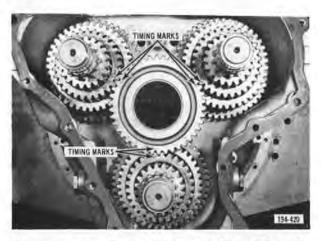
Front Mainshaft Third Speed Gear Temporarily Installed
